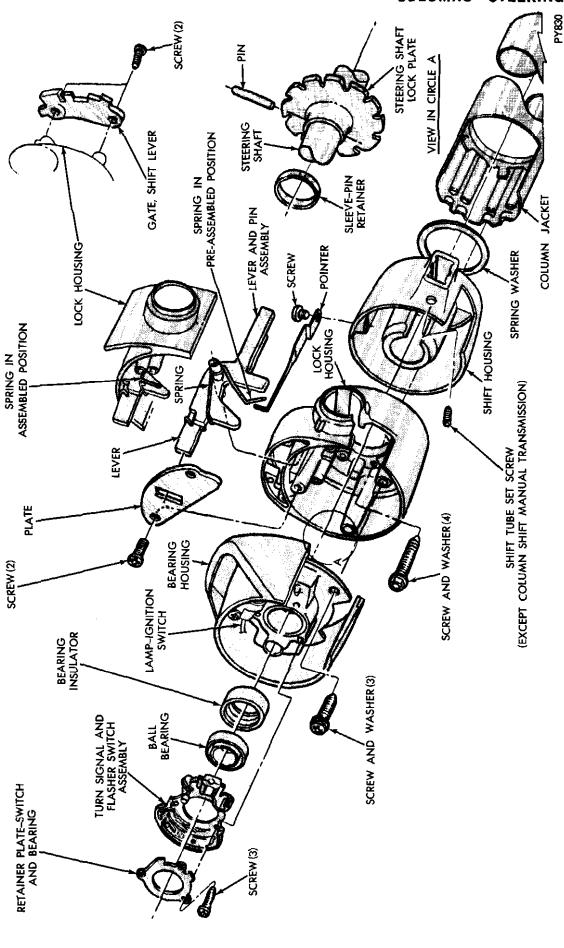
Steering Column Upper End-Disassembled (With Quadrant)
